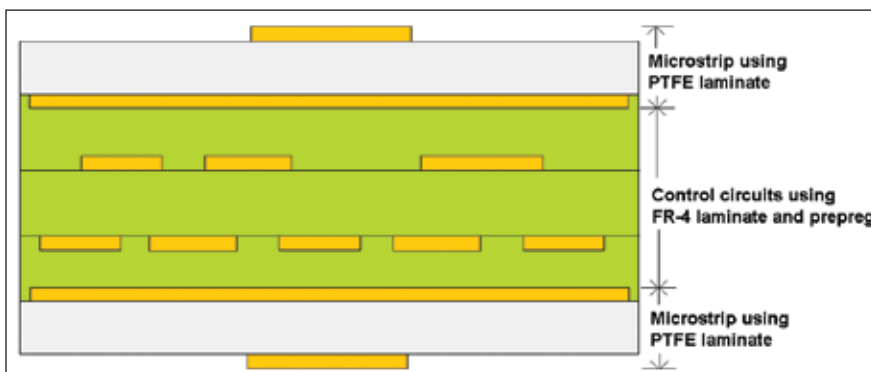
• This hybrid multilayer PCB combines FR-4 and PTFE circuit materials.
